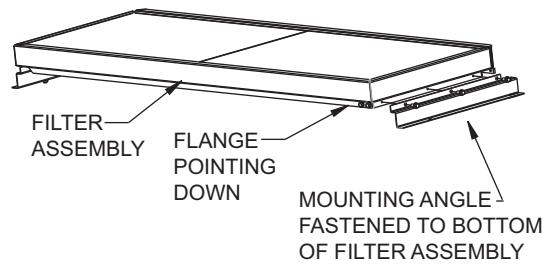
Correctly Assembled Bottom Filter Assembly, Sizes 020-035 Only
